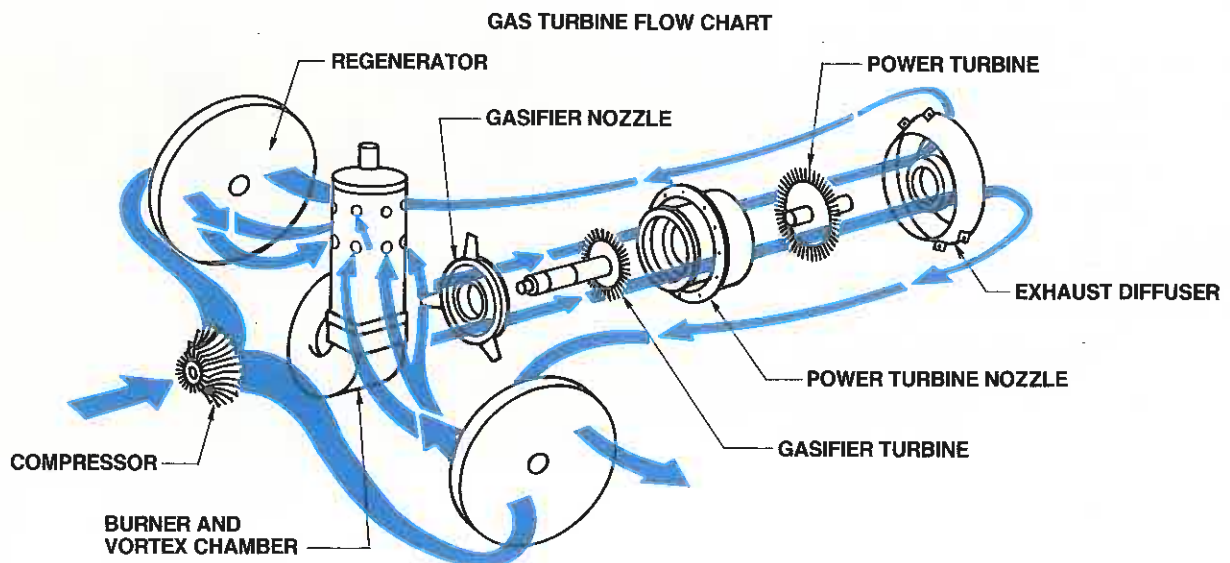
The gas flow is shown through the turbine parts. Courtesy of General Motors Corporation
